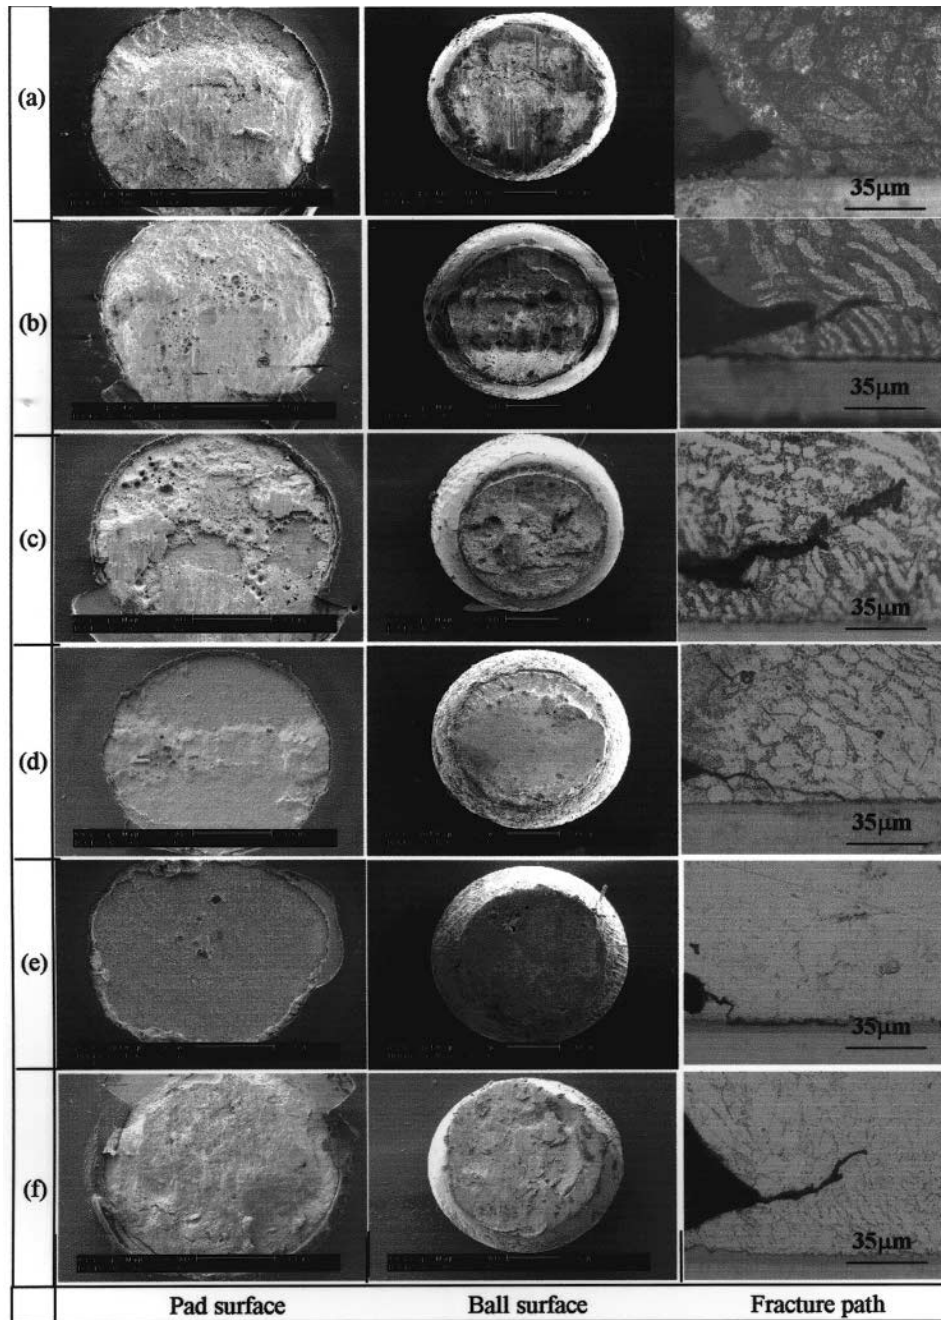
A macroscopic fracture surface of pad and solder surfaces after fatigue failure and the cross-sectional view of the failure paths of (a) Sn-3.5Ag, (b) Sn-3.5Ag-0.75Cu, (c) Sn-3.5Ag-1.5Cu, (d) Sn-3.5Ag-2.5Bi, (e) Sn-3.5Ag-7.5Bi, and (f) Sn-0.7Cu alloys for  $\Delta_T = 15 \mu\text{m}$ .
